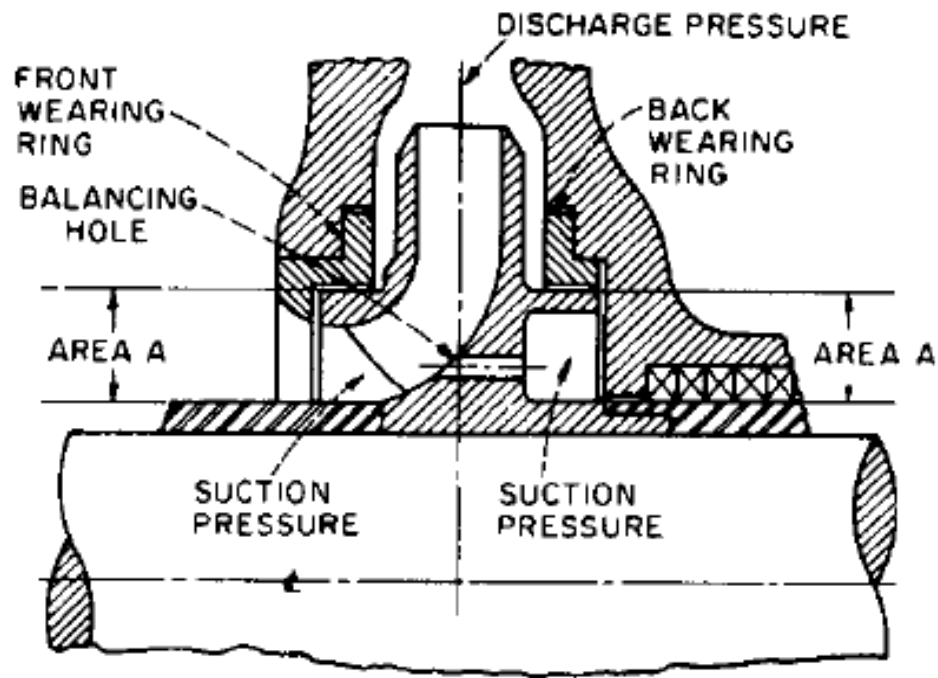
Balancing the axial thrust of a single-suction impeller by means of wearing rings on the back side and balancing holes
